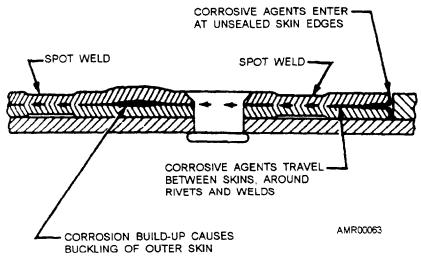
Spot-welded skin corrosion points.
